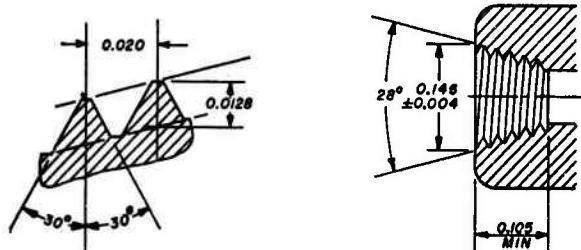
Thread details for shutter cable release tip and socket with taper (European) thread (50 tpi).
